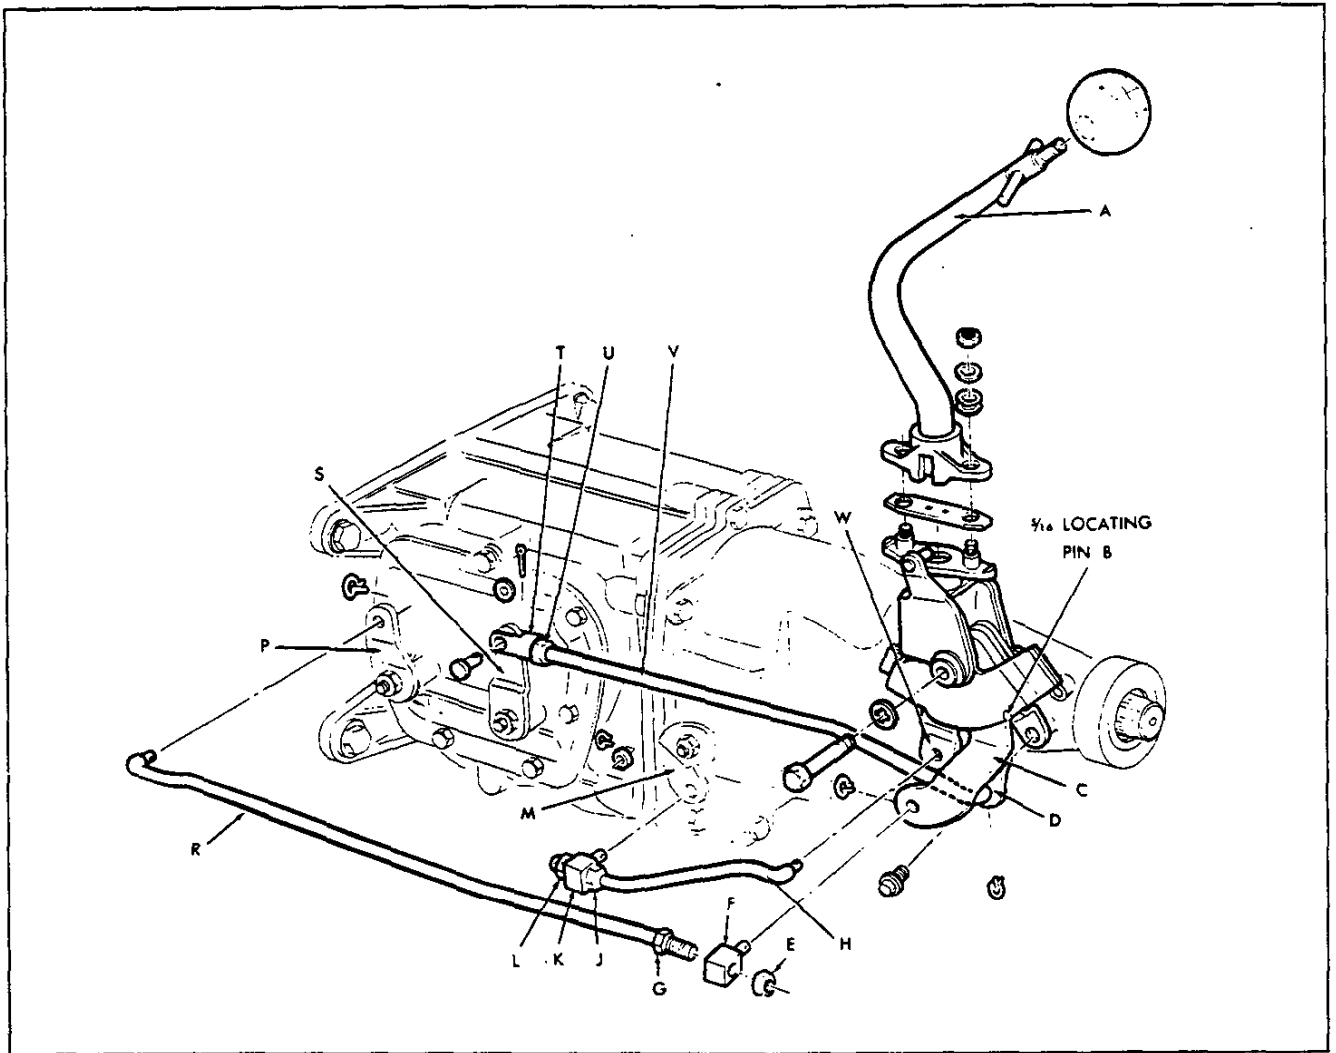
M—Four-Speed Transmission Gearshift Linkage
